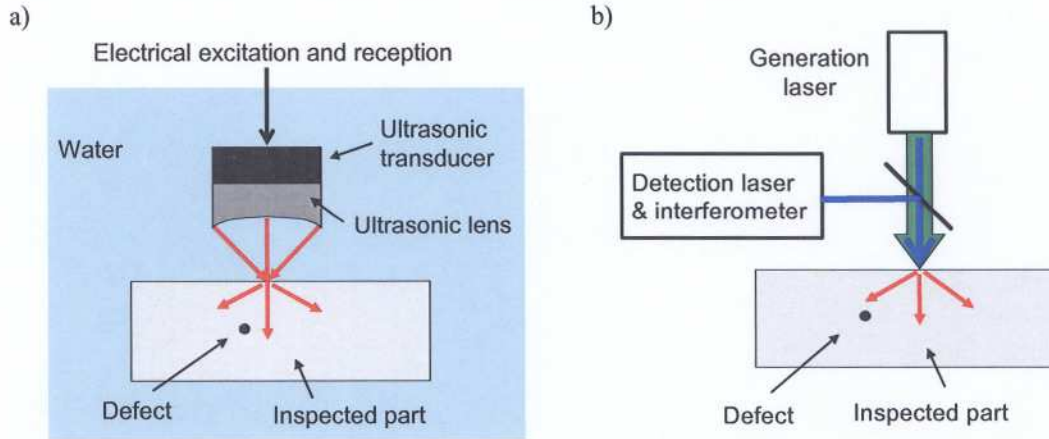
Measurement setups that can be used for inspection of FSW with SAFT. a) Immersion technique and b) laser-ultrasonics
